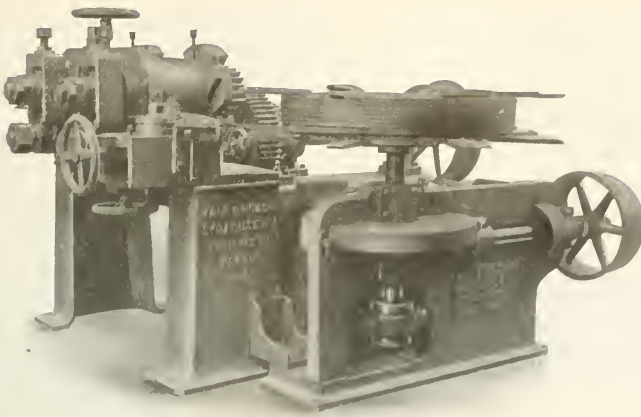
Kane & Roach Straightening, Sizing and Reeling Machine
